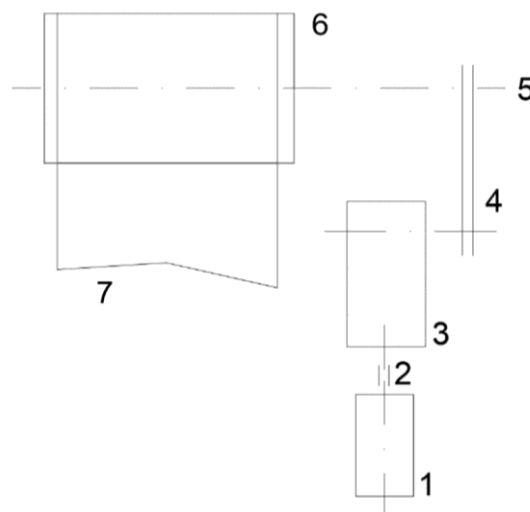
Diagram of the new pipe belt conveyor drive solution: 1 – electric motor, 2 – coupling, 3 – gearbox, 4 – belt transmission, 5 – drive drum shaft, 6 – drive drum, 7 – conveyor belt
